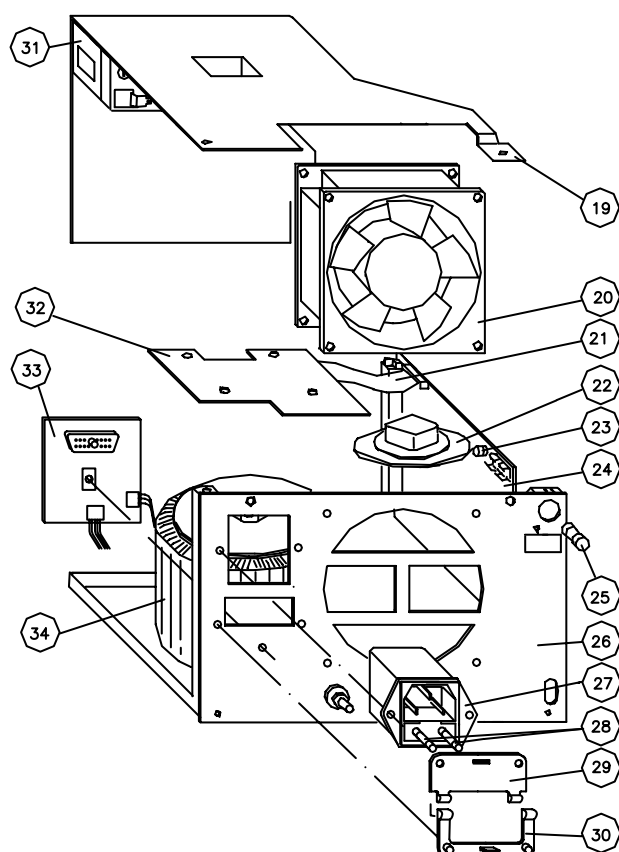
Exploded view of the Power Supply Unit, F-CU8 (-12)
